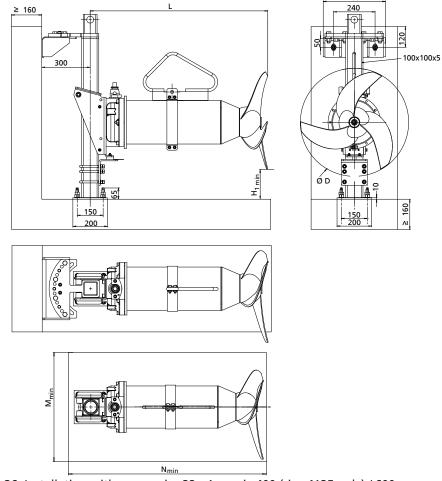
Installation with accessories 22 - Amamix 400 (size 4135 only) / 600
